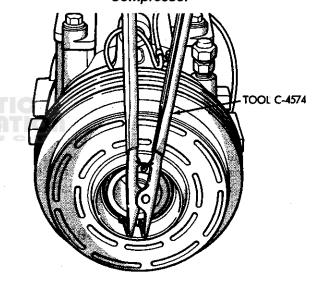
Removing Clutch Front Plate, C-171 Compressor
